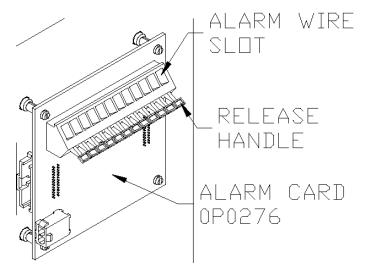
CB Alarm Expansion Board (12 circuit breaker module)
